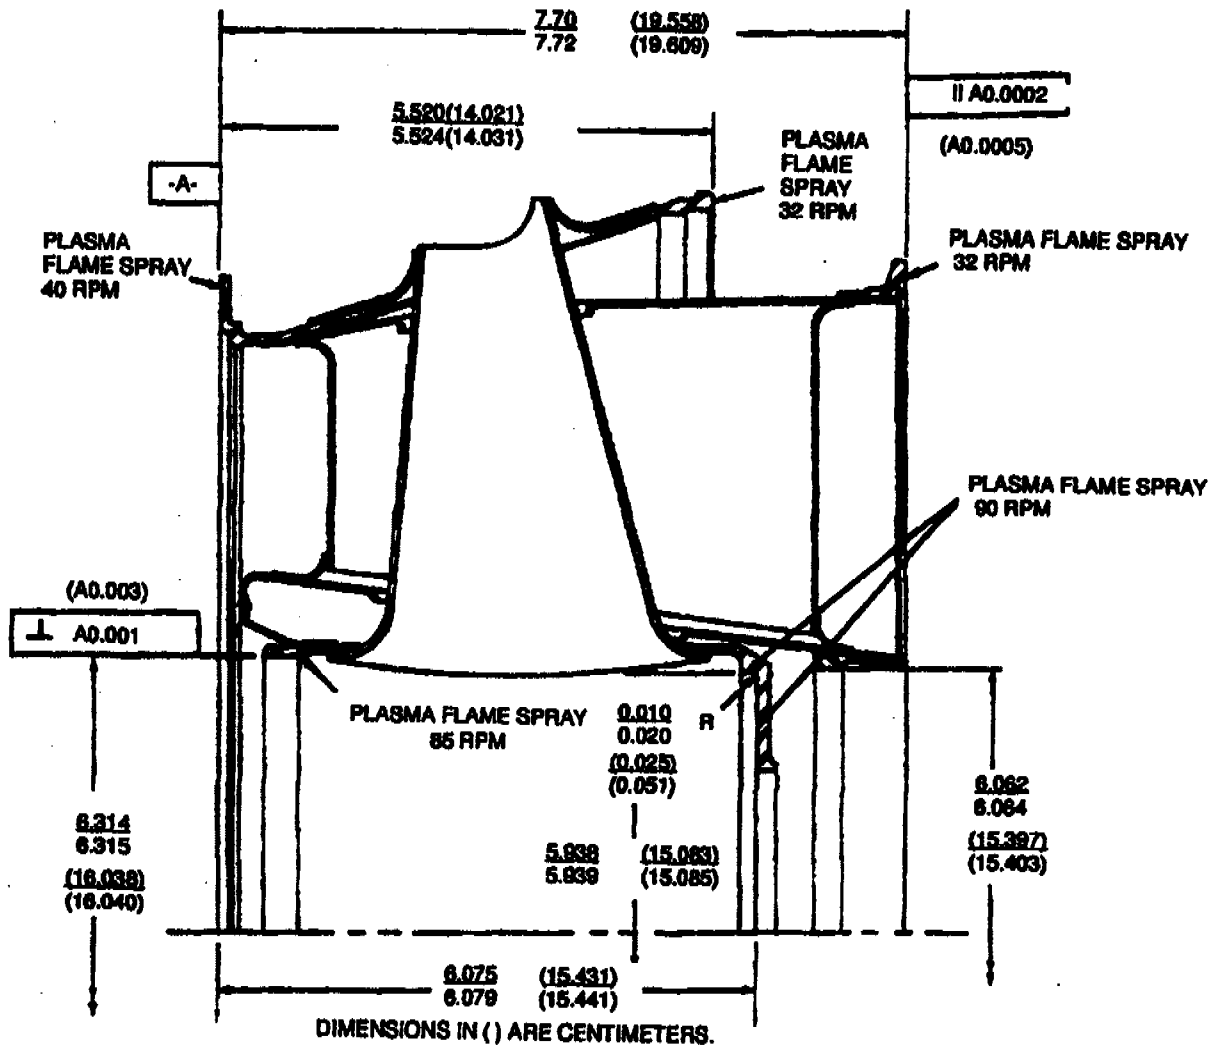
Exhaust Diffuser - Metal Spray Areas.
